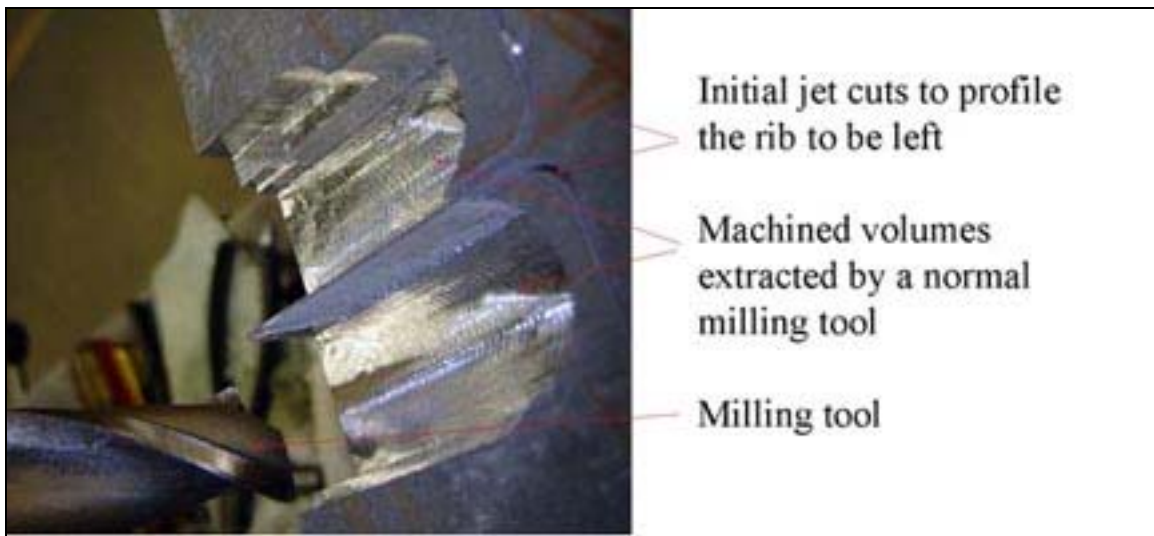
"Scrap" material removed by cutting both sides to controlled depth.
